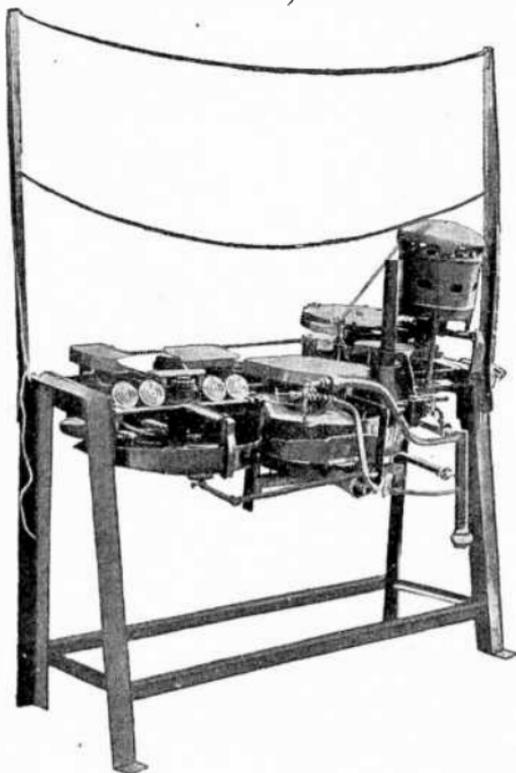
,208.—Chapman full automatic thermostatic wafer soldering machine. *In operation* automatic dial feed timing is arranged to take stock from a chute. Timed immersion in flux; four tests for sound stock and proper entry in machine; four throw outs for defective stock or entry. The machine does not stop but throws out the defective pieces and keeps on going. Solders by immersion, and a gentle removal from solder bath, then spun at 1800 r.p.m. to throw off excess solder. Cooled in a device to prevent sticking of sections together, and discharged through a non-denting device (not shown).
